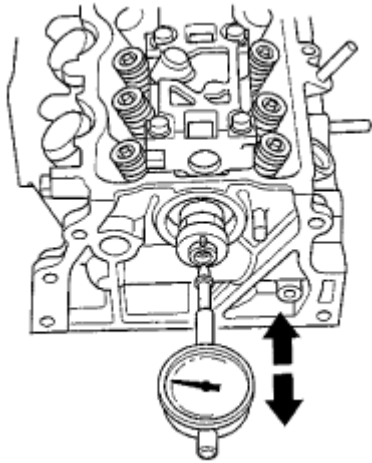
Pushing Camshaft Back And Forth, And Read End Play
